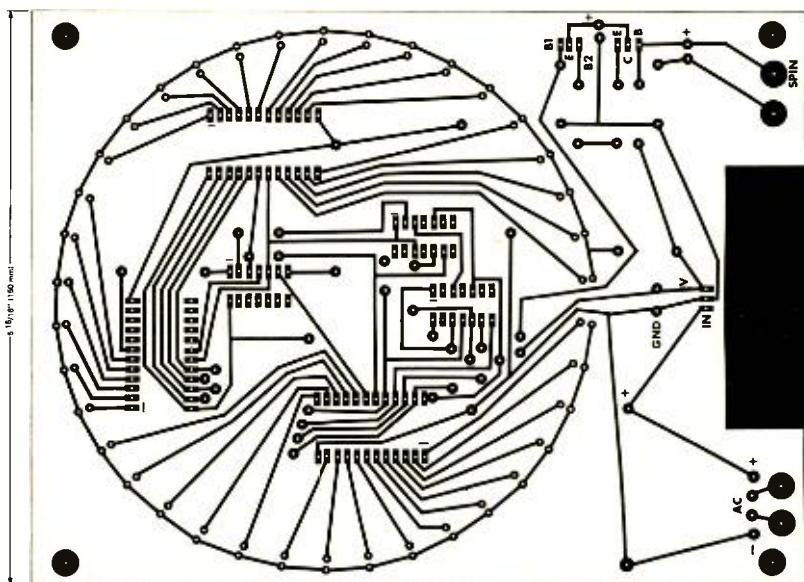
PRINTED CIRCUIT BOARD shown half-size.
